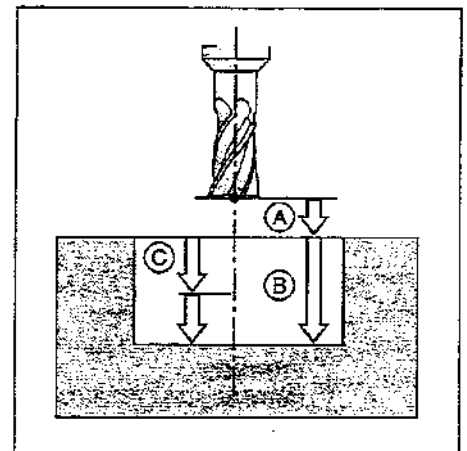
Distances and infeeds for CIRCULAR POCKET MILLING
